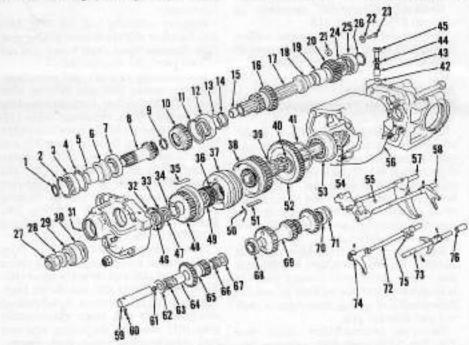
Exploded view of 12 speed synchromesh transmission used on 1490 models.
